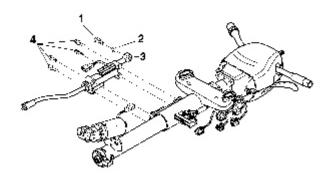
Telescope Actuator Assembly, Screws, Ball & Bolt Courtesy of GENERAL MOTORS CORP.
